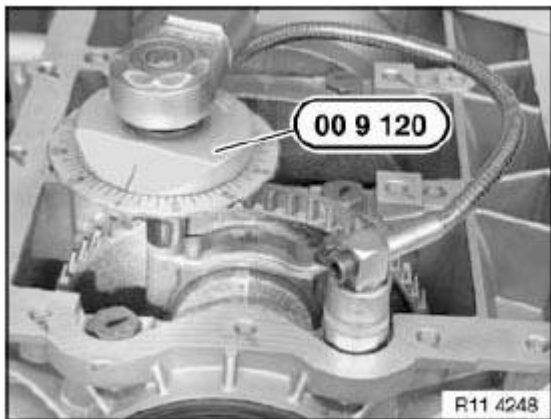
Adjusting Conrod Torsion Angle Using Special Tool 00 9 120
